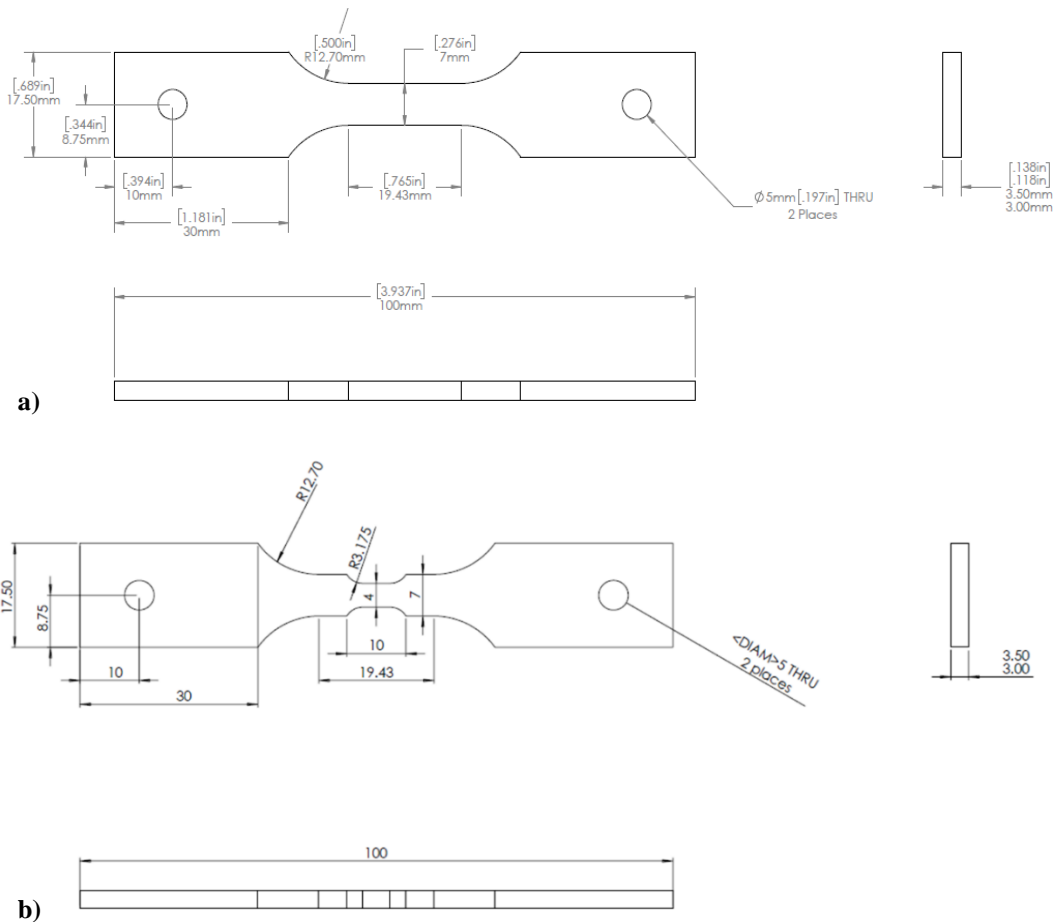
Specimen dimensions for Gleeble-based mechanical testing of HSLA-80 steel: a) single-reduced gauge section, b) double-reduced gauge section (dimensions in mm).
